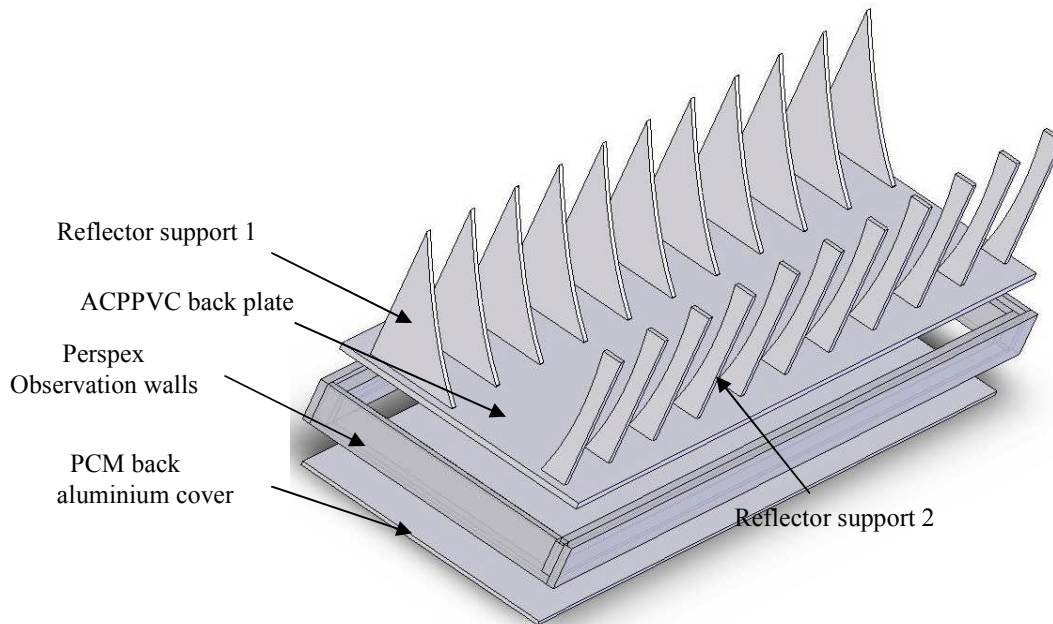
An exploded view of the ACPVVC-55/PCM system
